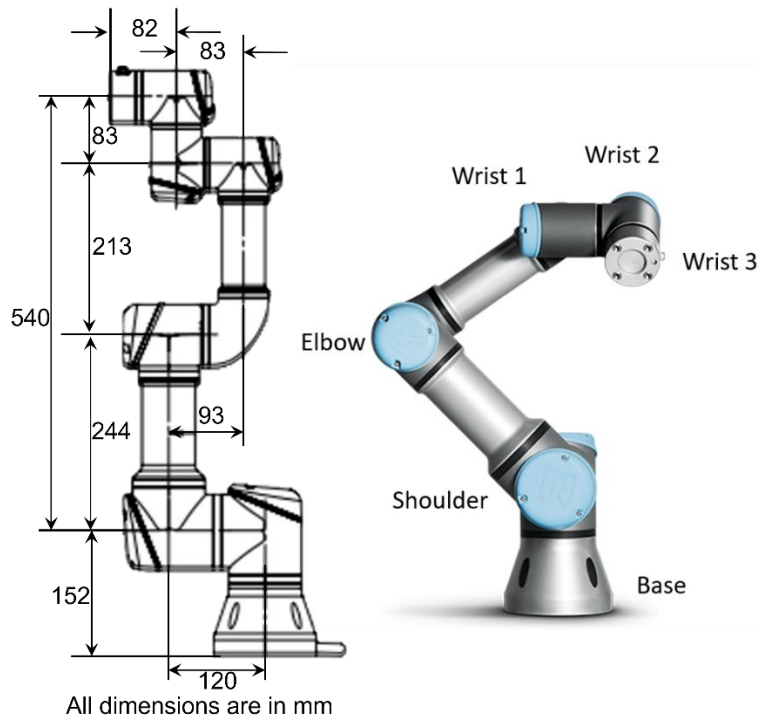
Dimensions and configuration of arm robot UR3/CB3
